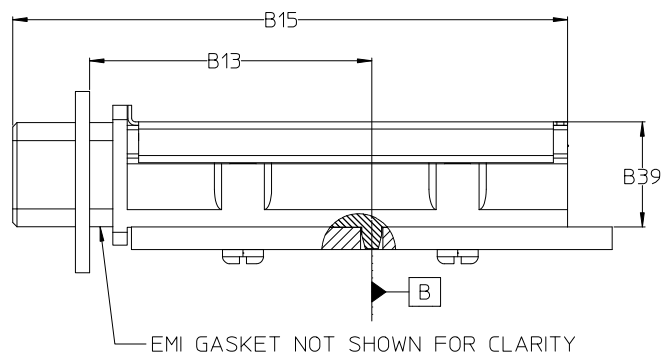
x4 Standard (0°) EMI Guide Housing Assembly Side View
